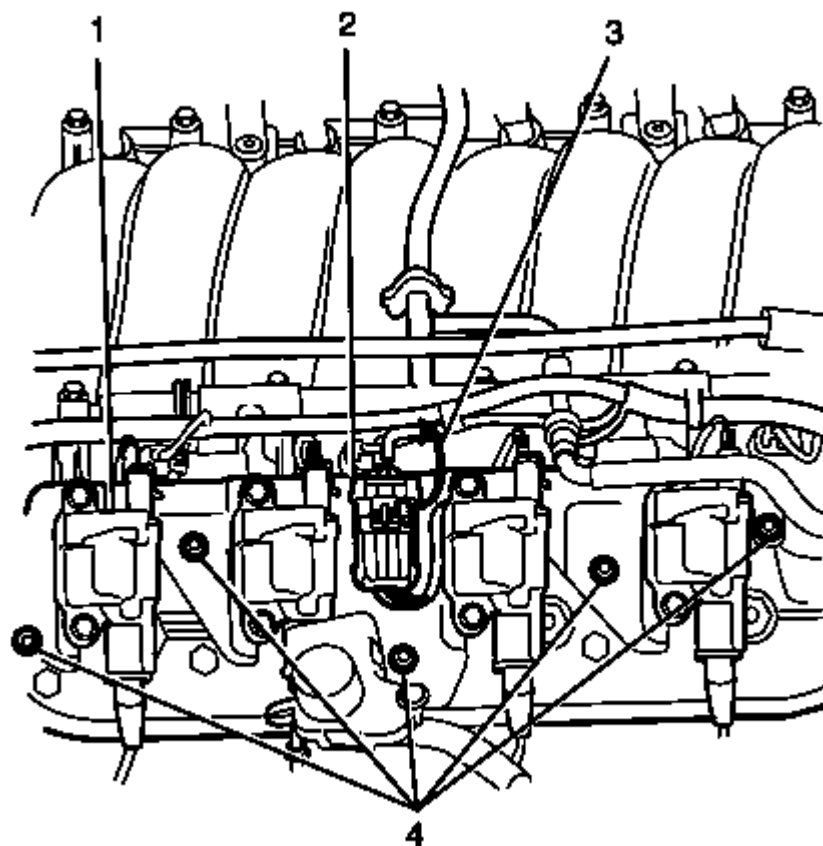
Identifying Ignition Coil Assembly To Valve Rocker Arm Cover Retaining Studs (Left Side)
